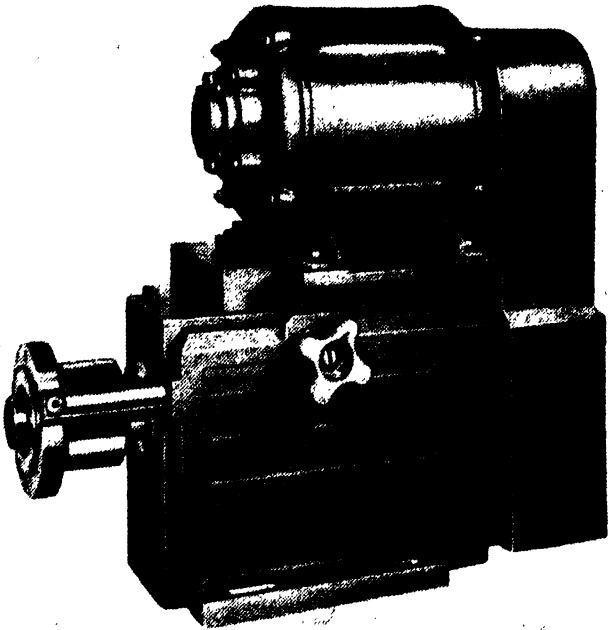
Number 21 Ex-Cell-O hydraulic power unit. (The Ex-Cell-O Corp., Detroit, Mich.)
